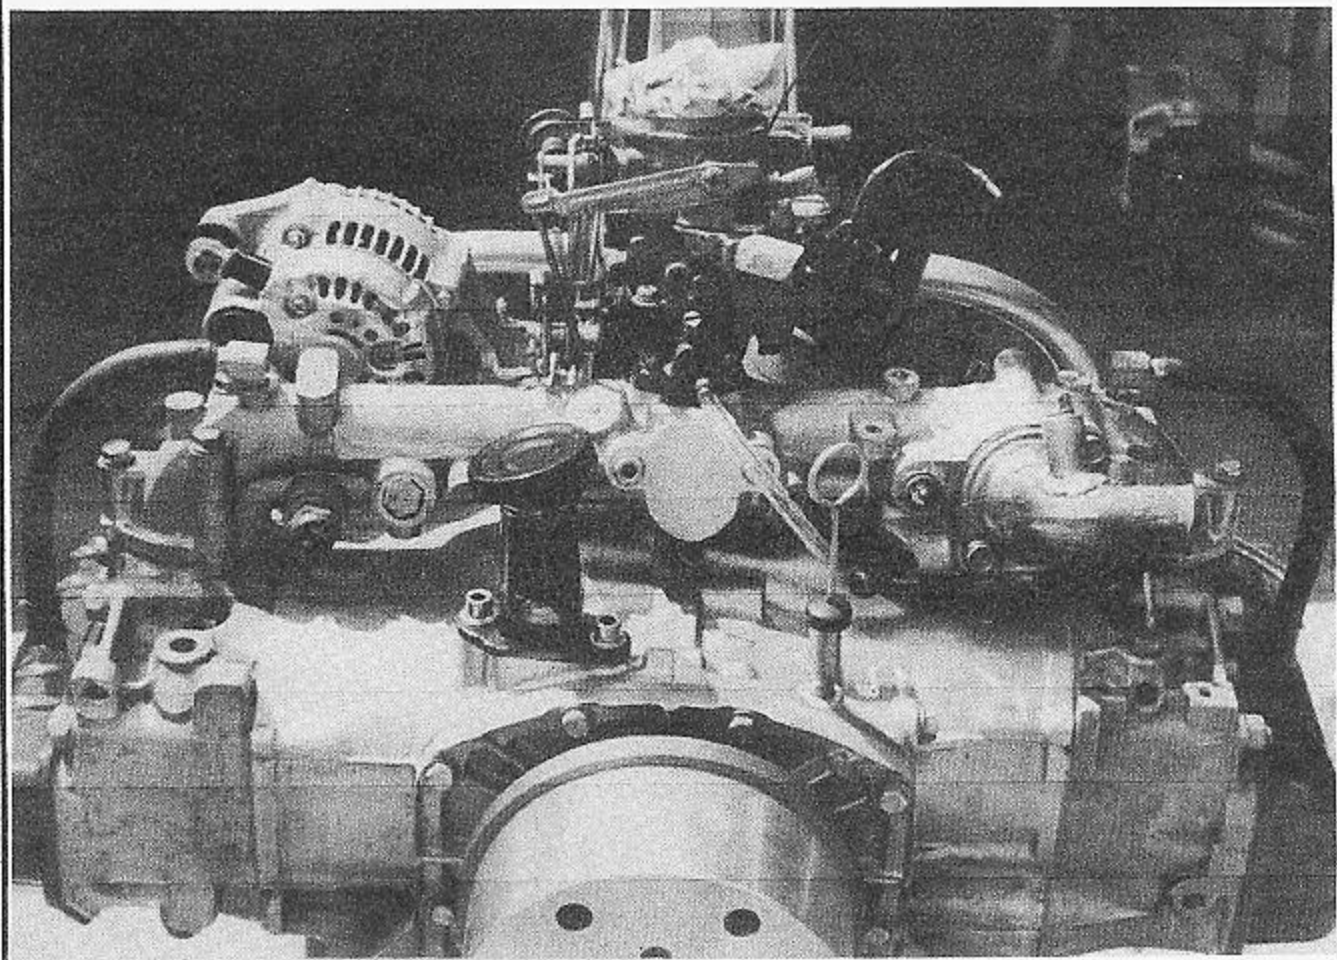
Top view of the converted engine. Carburetor is a Holly 5210. Alternator in upper left is a Japanese unit used on several Nissan autos. A smaller alternator can be used to save weight.
